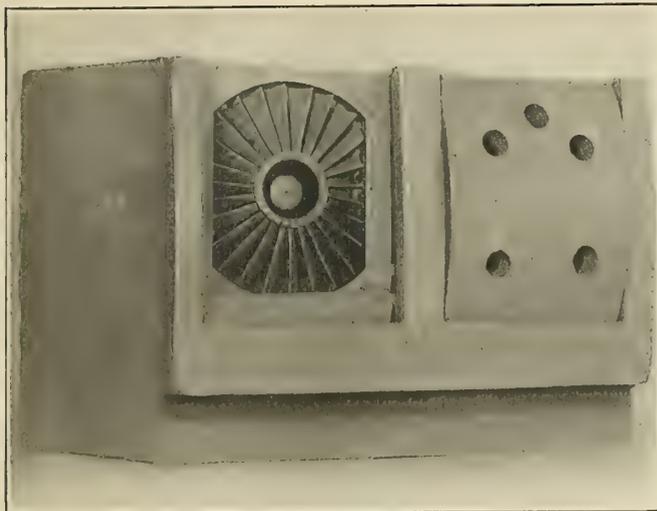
FITTING OF OIL BURNERS FOR COAL AND OIL, REAR VIEW
